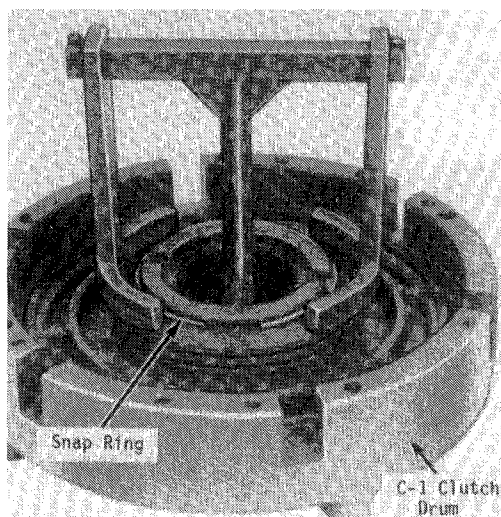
Use a suitable horseshoe shaped tool to compress Belleville washers when removing and installing retaining ring.
